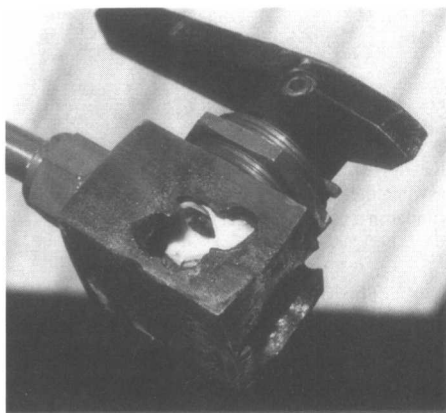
This ball valve ignited when it was opened on a high-pressure oxygen line in a cylinder filling plant. It was one of many ball valves used throughout the plant on all gases, including many oxygen lines.
